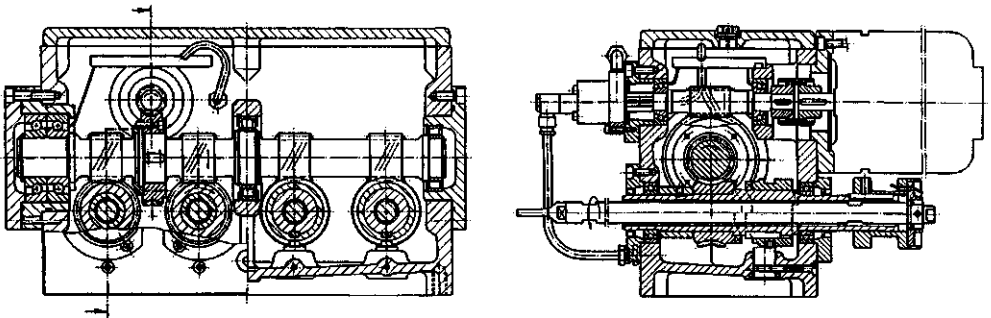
Spinning pump worm gearbox for 4 pumps with hollow and stub shafts [22]
